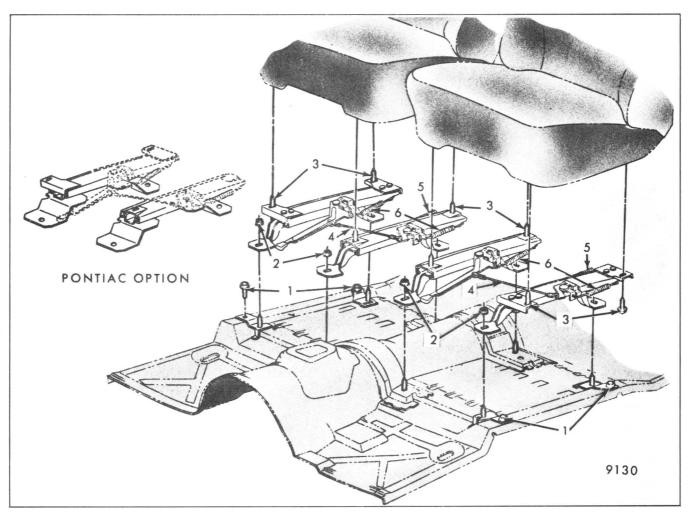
"X" Body Bucket Seats and Adjusters
